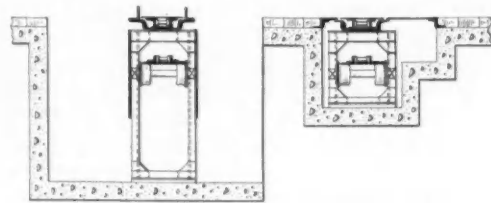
FINAL-ASSEMBLY CONVEYOR
